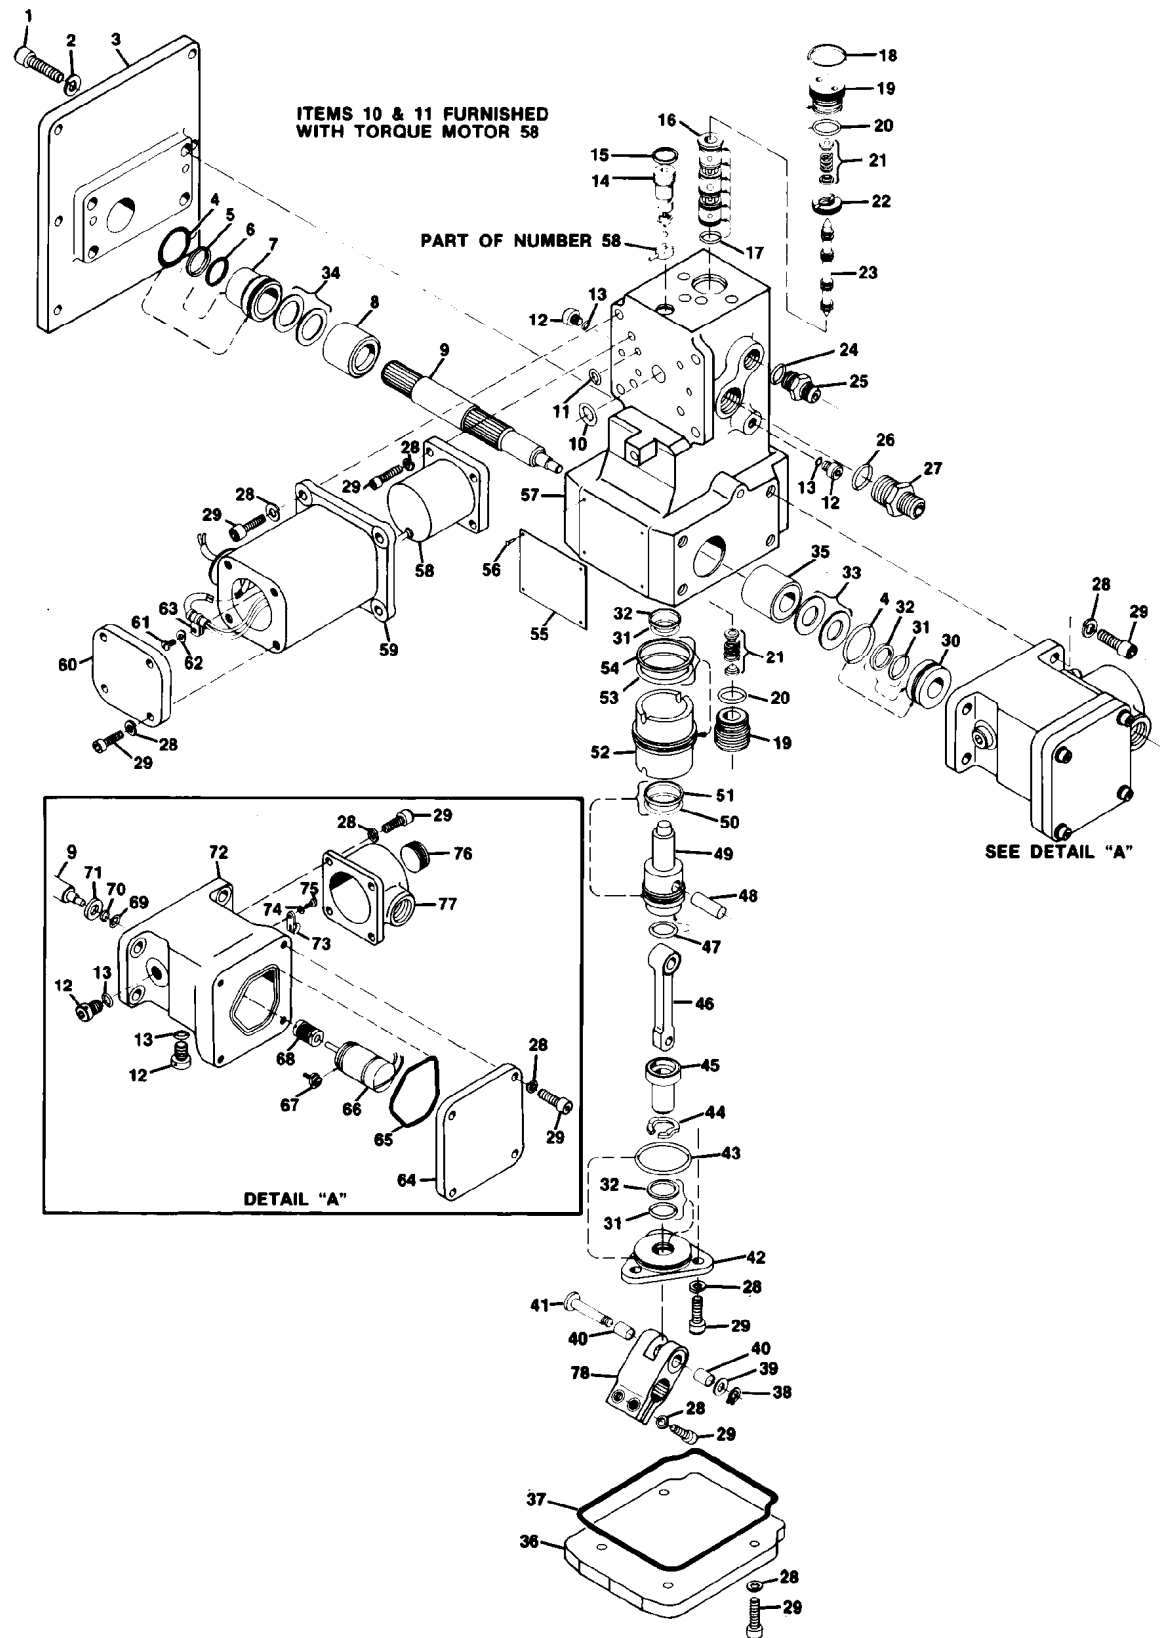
Exploded Drawing, TM-55 Integrating Actuator
